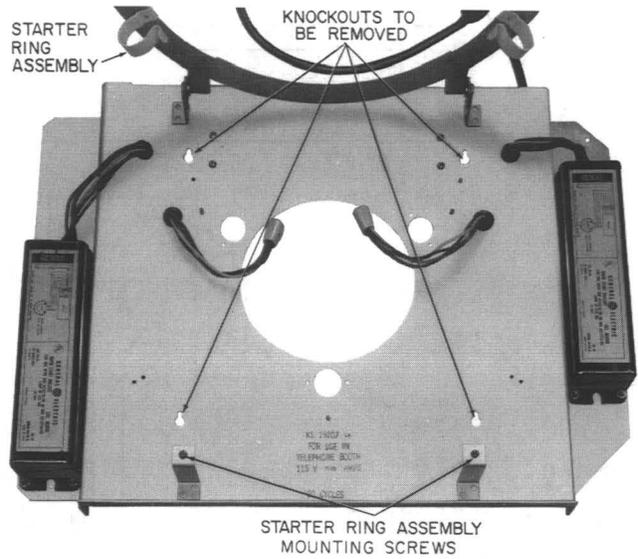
KS-19207 Light Fixture With Starter Ring Assembly in Raised Position
